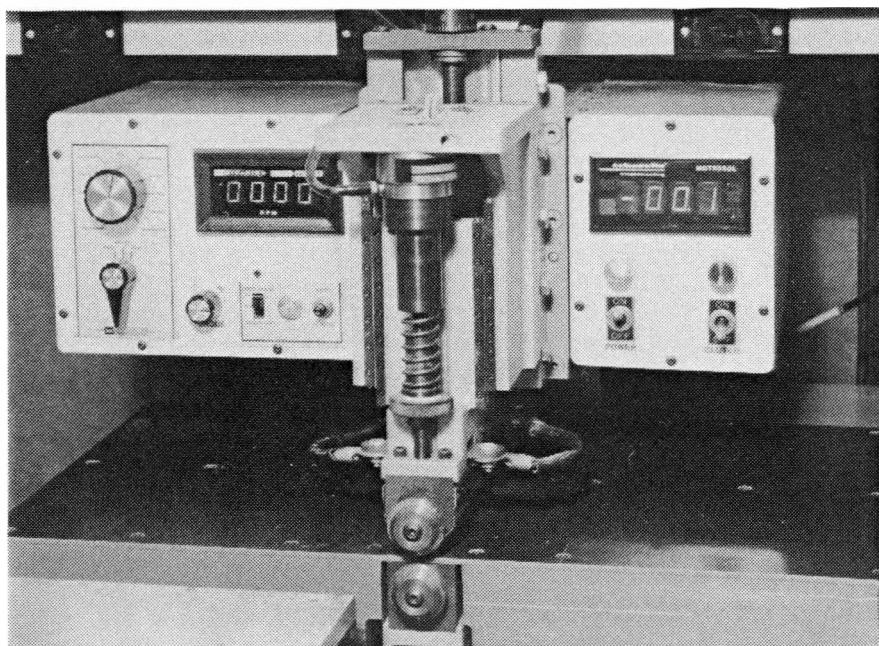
Close-Up of Opposed Electrode Seam Welding Head
